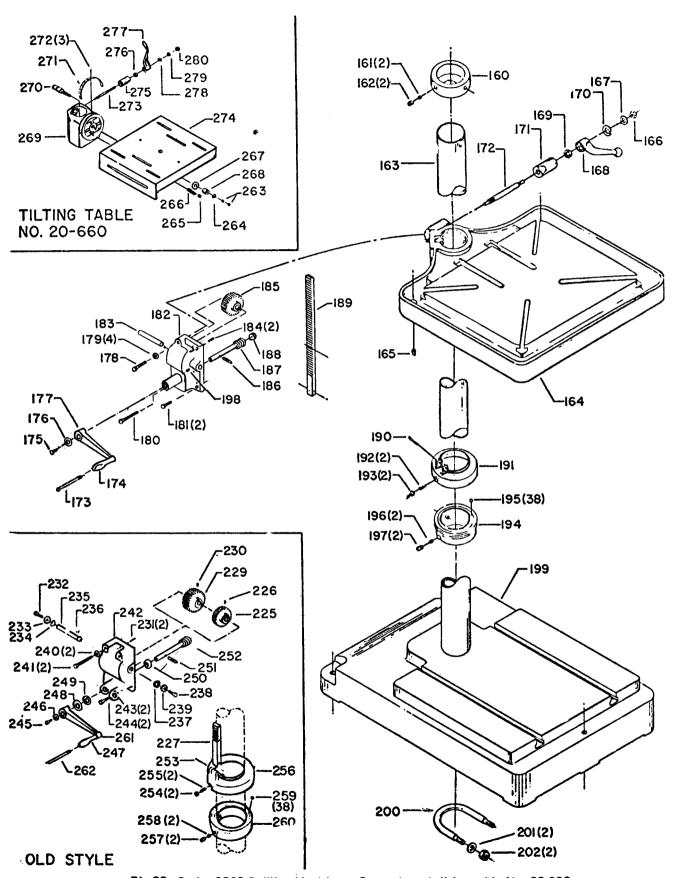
Series 2000 Drilling Machines - 8 speeds and tilting table No. 20-660
